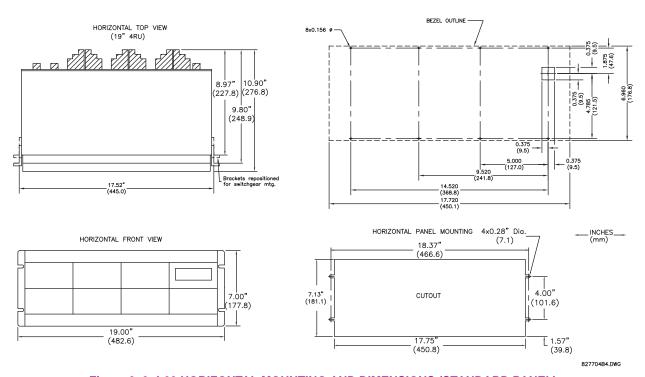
L60 HORIZONTAL MOUNTING AND DIMENSIONS (STANDARD PANEL)
